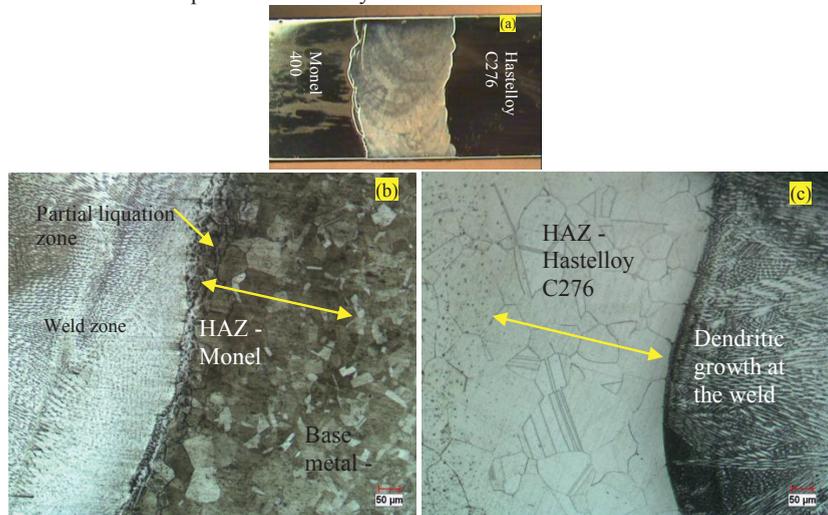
(a) Macro-photograph of the as-welded sample; Microstructure showing (b) weld - HAZ - parent metal of Monel 400 (c) weld - HAZ - parent metal of Hastelloy C276
